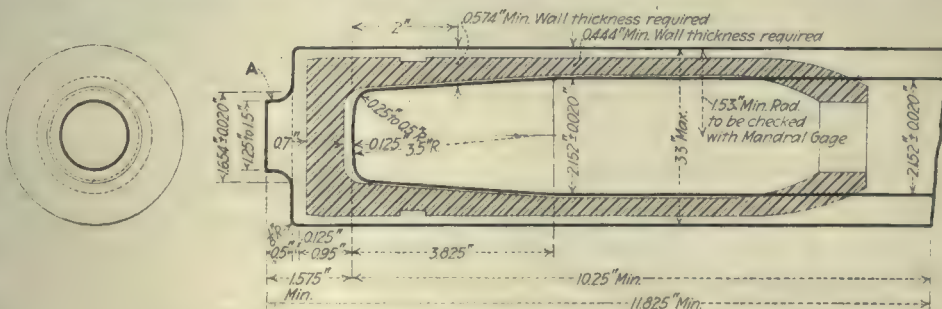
OUTLINES OF FORGING AND FINISHED SHELL
